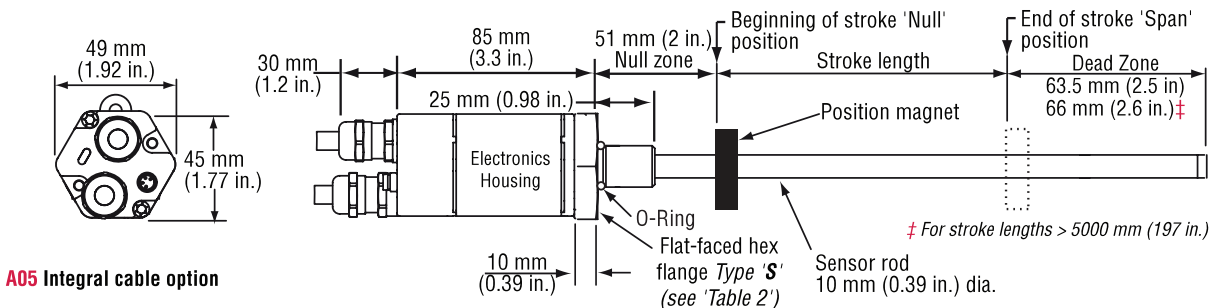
Model RH Rod-style sensor dimension reference (Shown with the A05 Integral cable connection type option)
